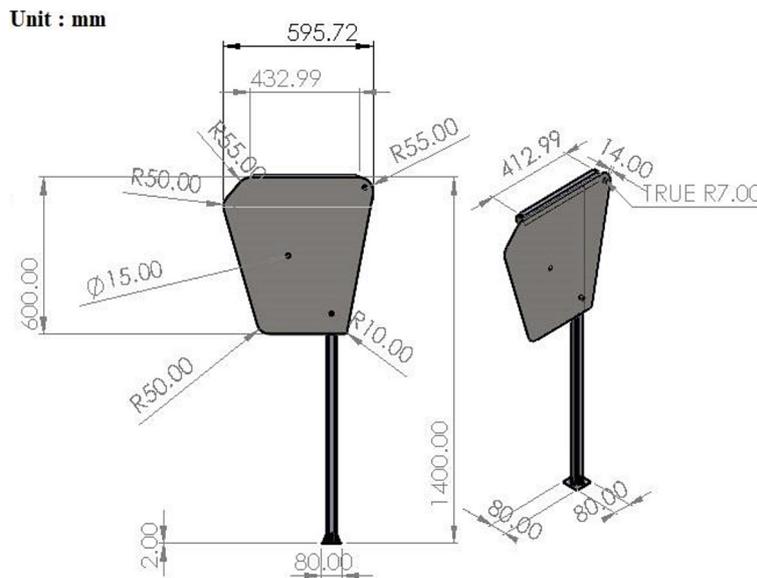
The geometry drawing of Pot hauler and the overall dimension
